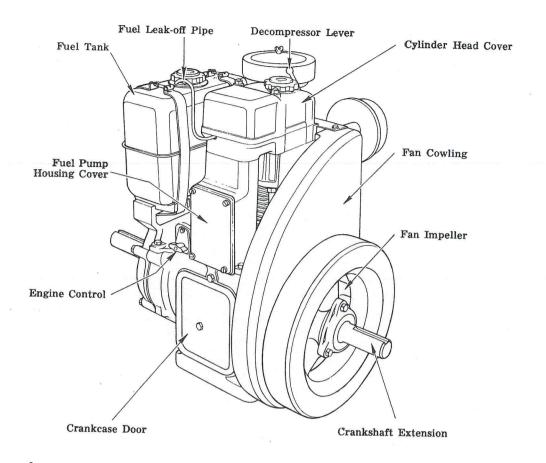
Type LD1 or SL1 Engine—Front View.
